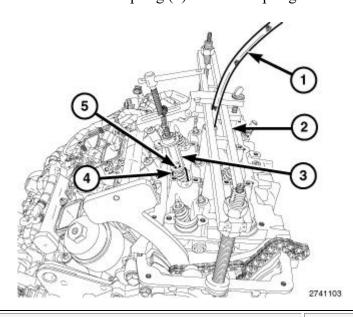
Valve Spring & Valve Spring Retainer Courtesy of CHRYSLER GROUP, LLC
